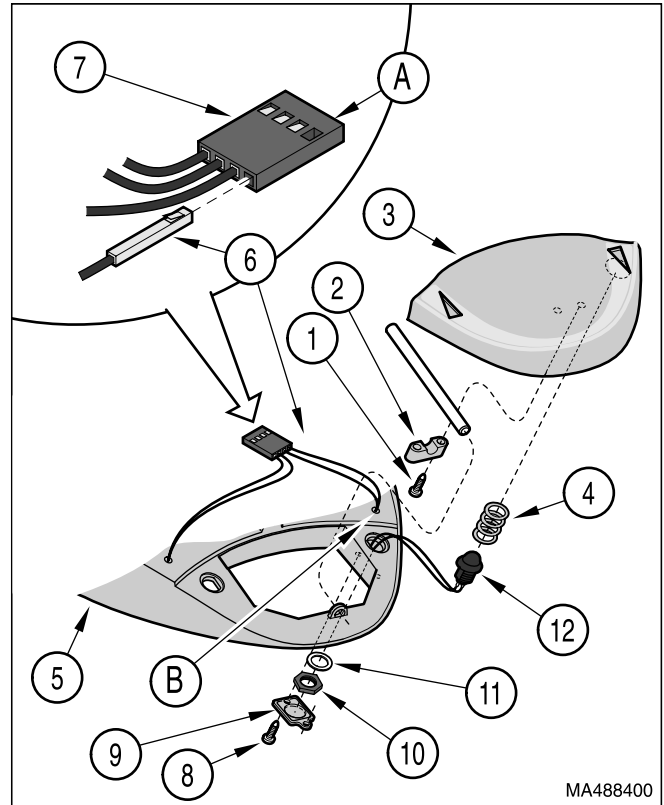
Foot Control *Foot Pedal* Switch Removal / Installation
